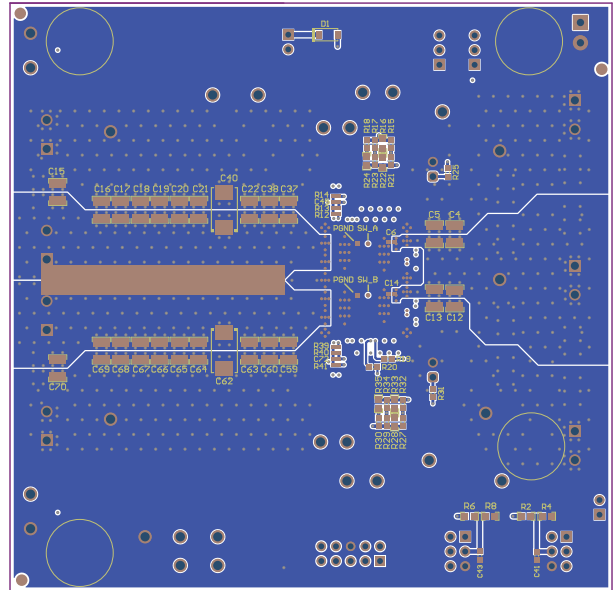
TPSM8D6B24EVM-2V0 Bottom Side Component View (Bottom View)
